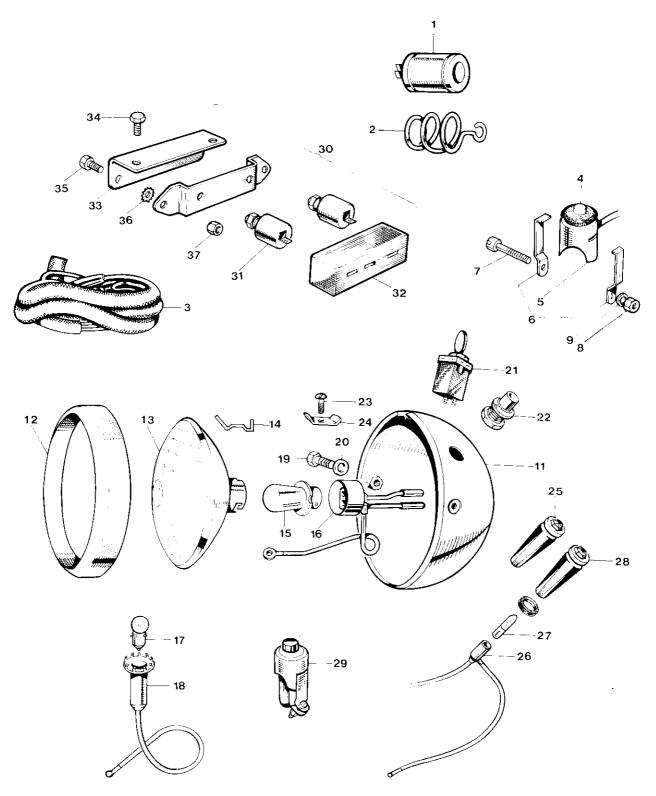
IGNITION CAPACITOR AND T100C HEADLAMP
